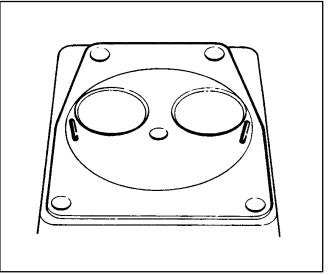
CHECKING CYLINDER HEAD CLEAR-ANCE (AIR COOLED HEAD SHOWN)
